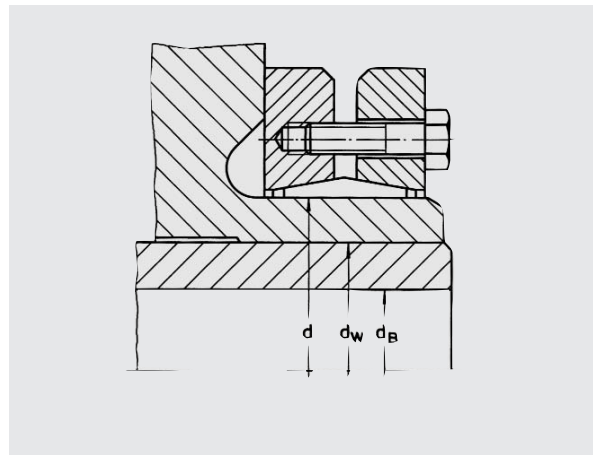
RINGFEDER® Shrink Disc application using a hollow shaft
